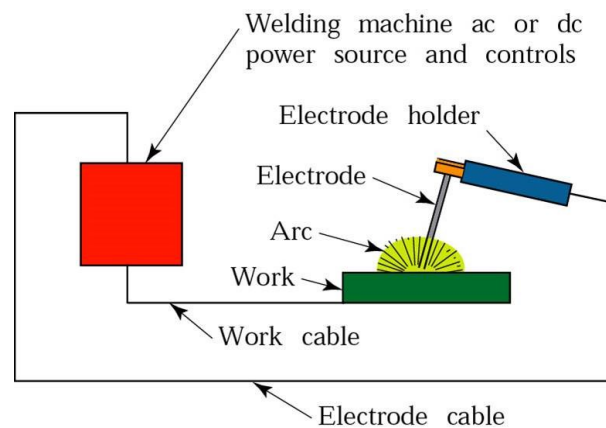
Principle of metal arc welding (Youssef, 2017)
